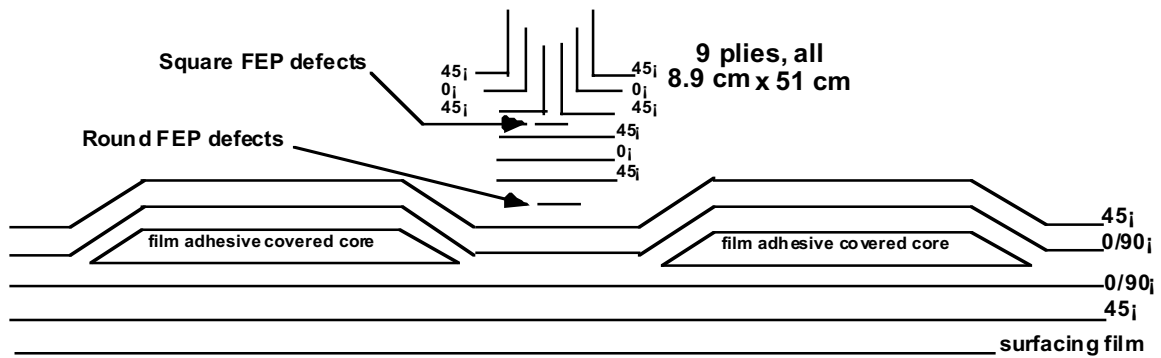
Side view of defect layout of double ramped sandwich panel with cocured T-stiffener blade.
